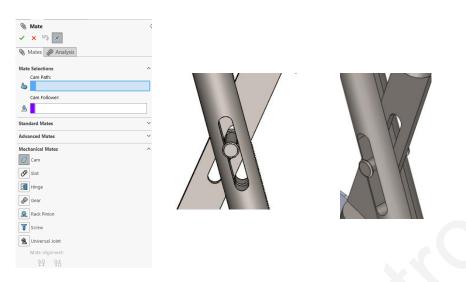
Central hole in X-shaped telescopes and adjusting to the solidworks in mechanical mates
